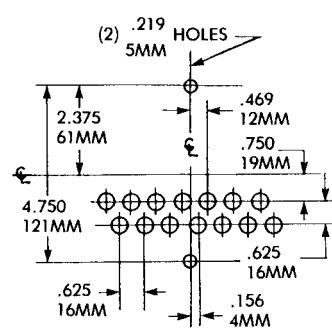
Panel drilling for surface mounting for Type C1 case relays on panels larger than 0.188 in. (5mm) thick
